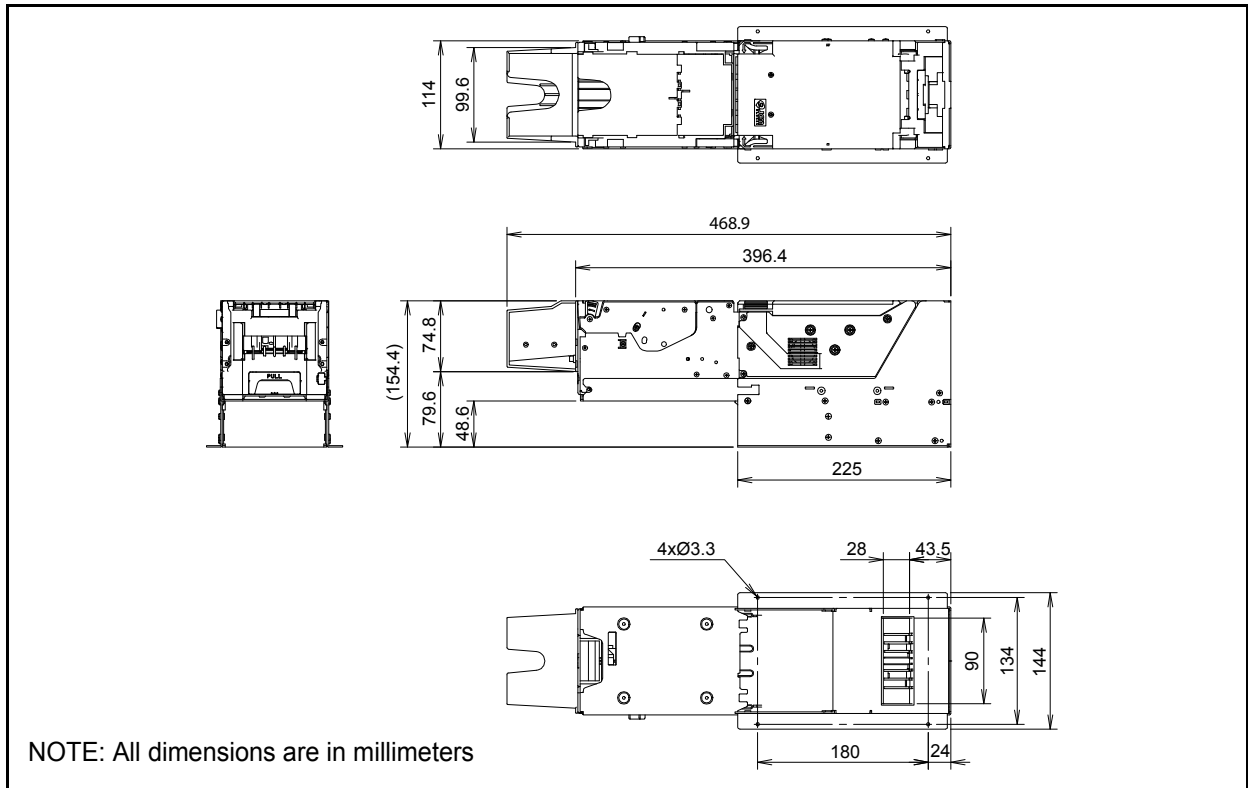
TBV FLD Version FLD Unit Outside Dimensions
